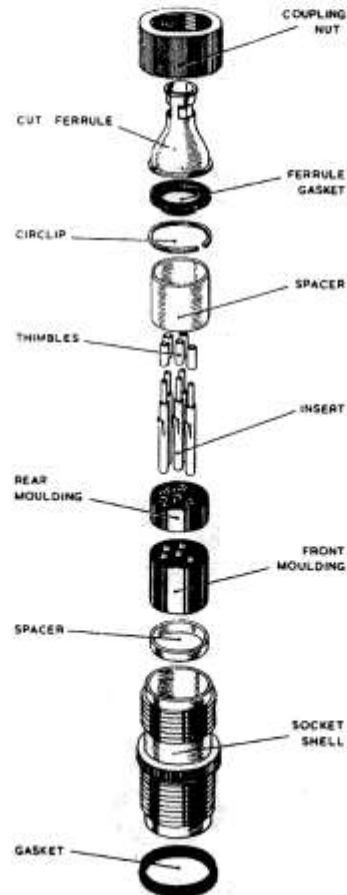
EXPLODED VIEW OF CLIMATIC-PROOF SOCKET
